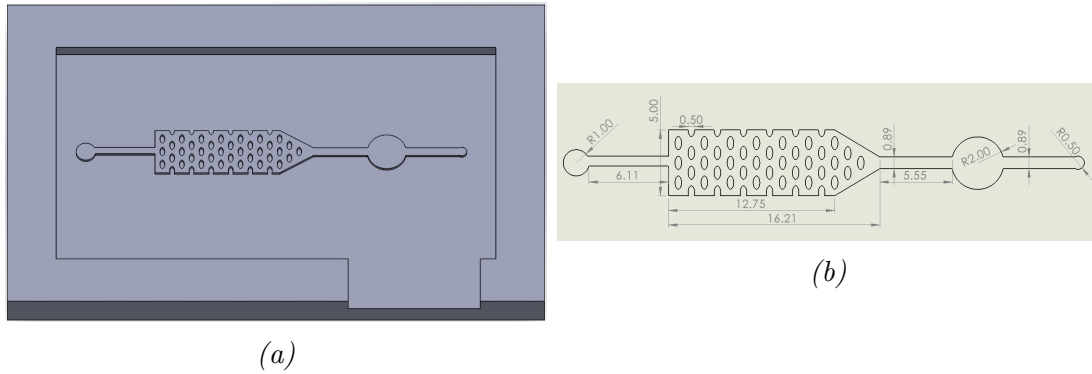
The final design with Tris buffer flush through in Solidworks (a) and the technical drawing with top view (b).
